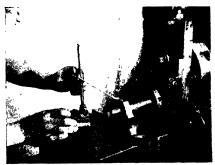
Another job setting being checked up with surface gauge on shaping machine
